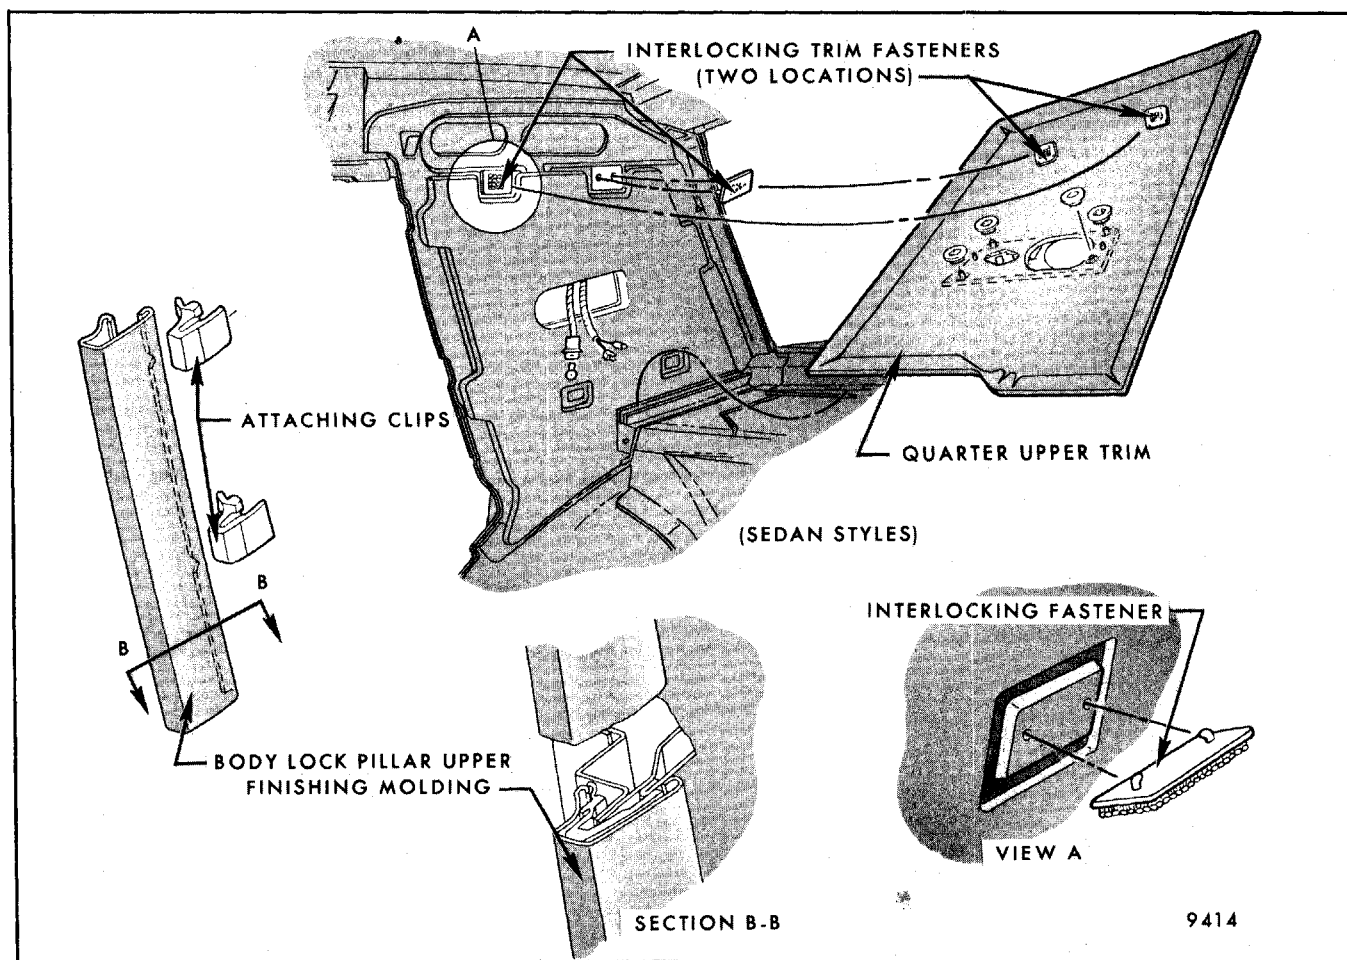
Quarter Upper Trim Attachment - "B,C,K" 4-Door Styles
